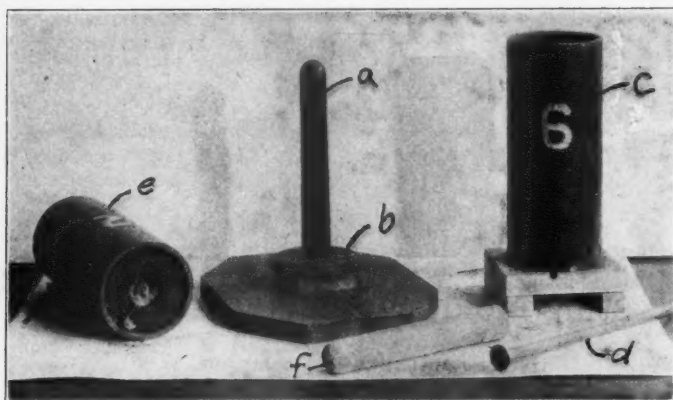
SPECIAL EQUIPMENT USED IN DURABILITY TESTS—A, PATTERN; B, STRIPPER PLATE; C, FLASK ON BOTTOM BOARD; D, RAMMER; E, MOLD READY FOR SHAKING OUT; F, CASTING MADE IN TEST MOLD
